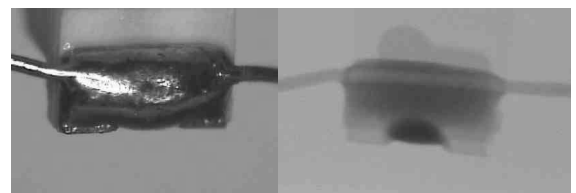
Laser soldered contact of a LED (left) and X-ray inspection of the joint (right)
